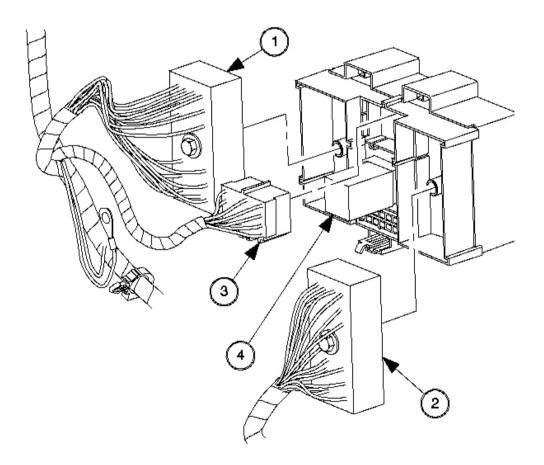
Removing/Installing Harness Connectors Courtesy of GENERAL MOTORS CORP.
